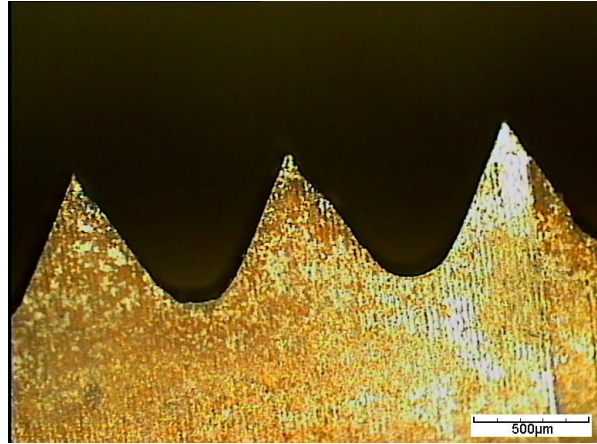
Microscopic image of back surface of  $\text{Ø}5.2\text{mm}$  316L stainless steel tube directly after LMJ cutting
